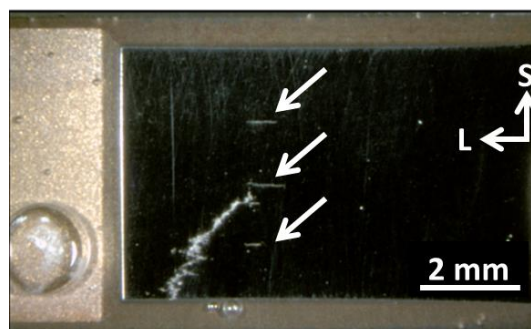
The fracture surface after an interrupted fracture toughness test on the T-L oriented specimen of ODS-KIT HR at RT. Arrows indicate the presence of secondary cracks before the growth of primary crack.
